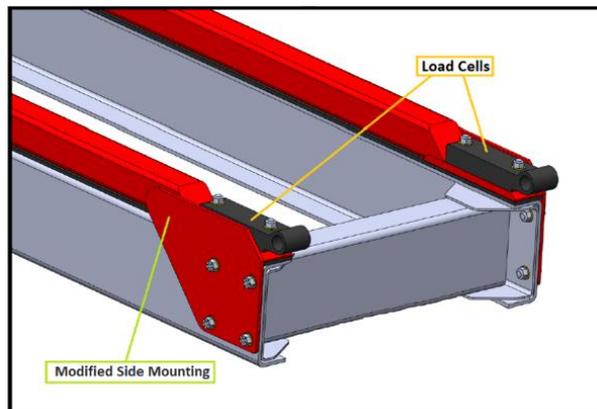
Example of load cells mounted to modified sub frame that maintains structural integrity. In this example, by enlarged and thickened mounting plates with upside down countersunk fasteners to prevent bolting through chassis flange)
